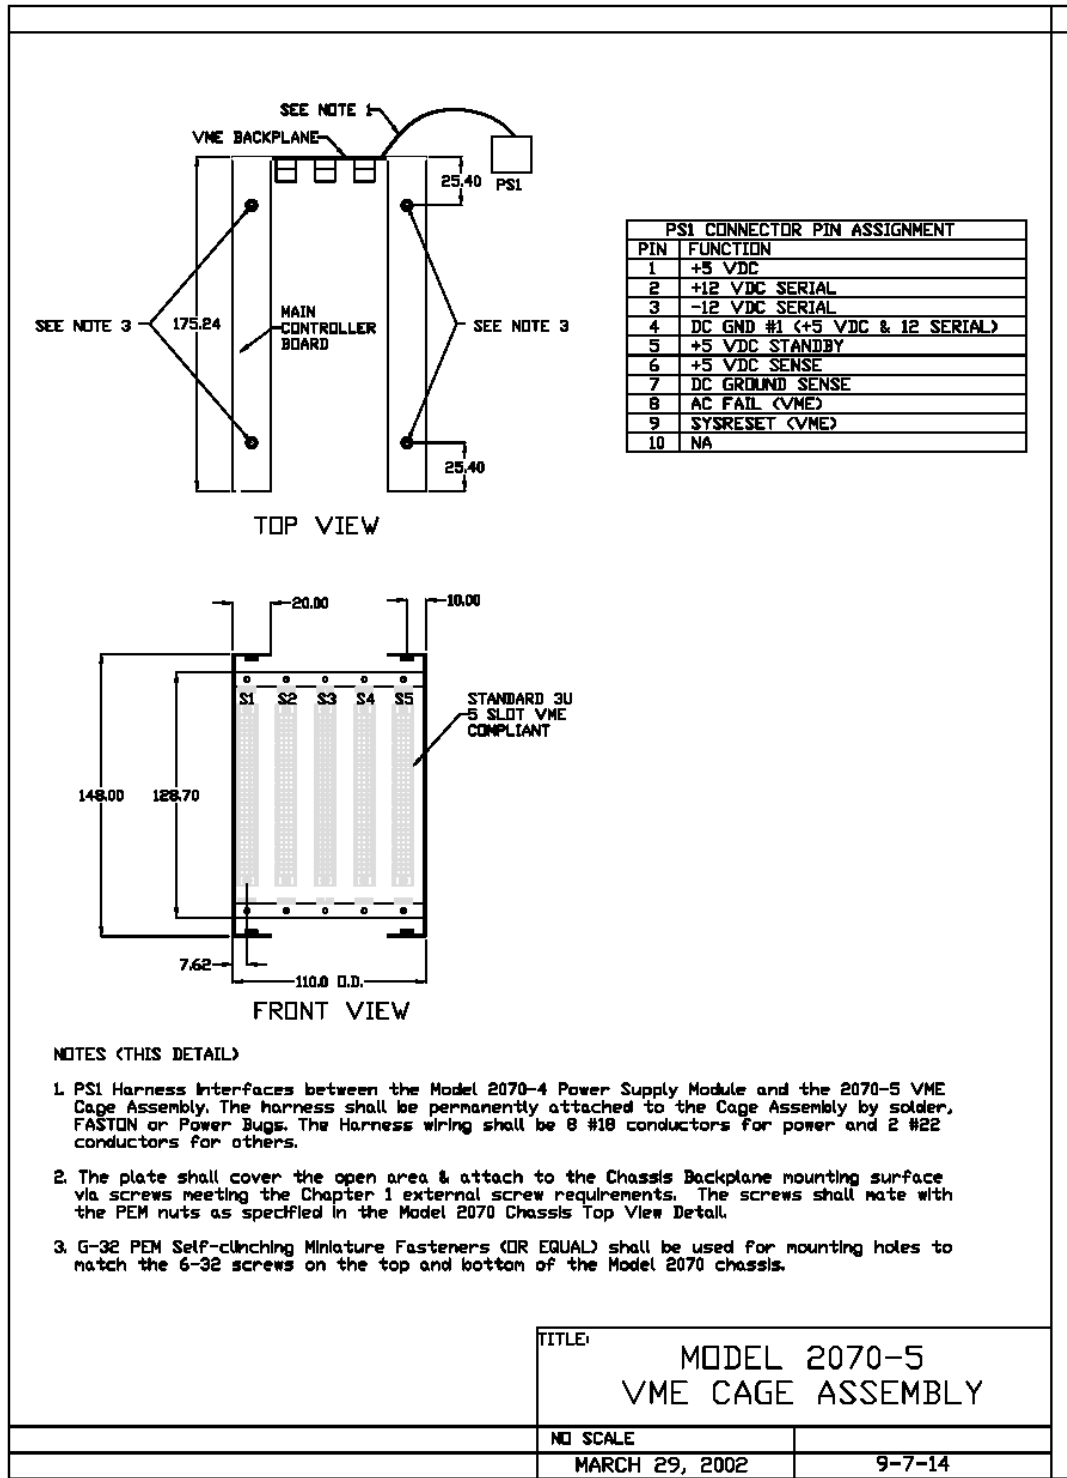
TEES DRAWING 9-7-14, Type 2070-5 VME Cage Assembly
